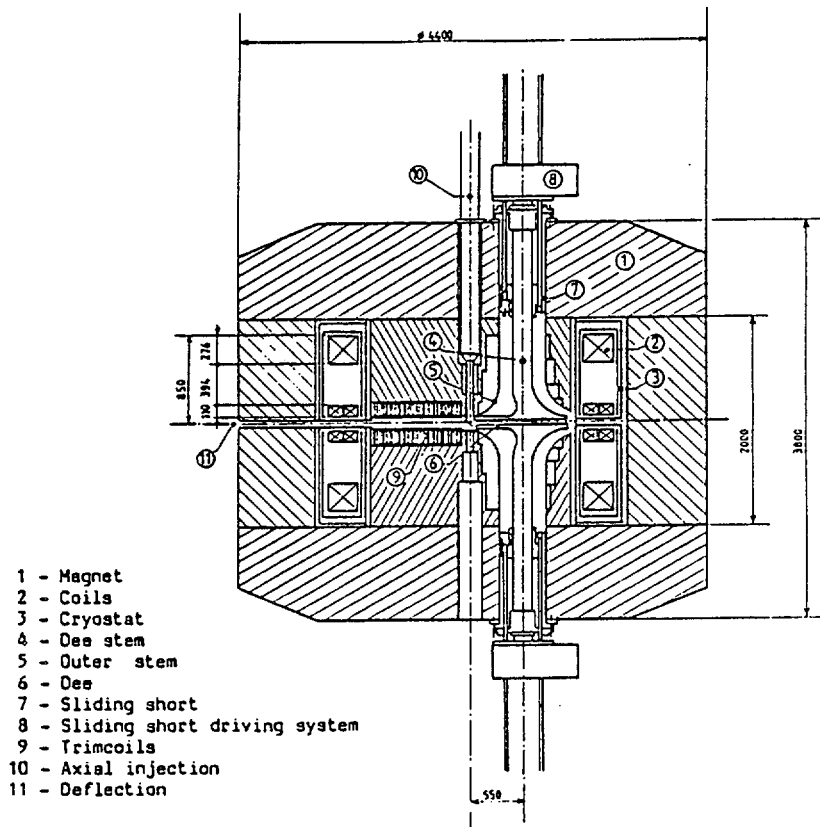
Exploded view of the Orsay cryogenic Cyclotron
